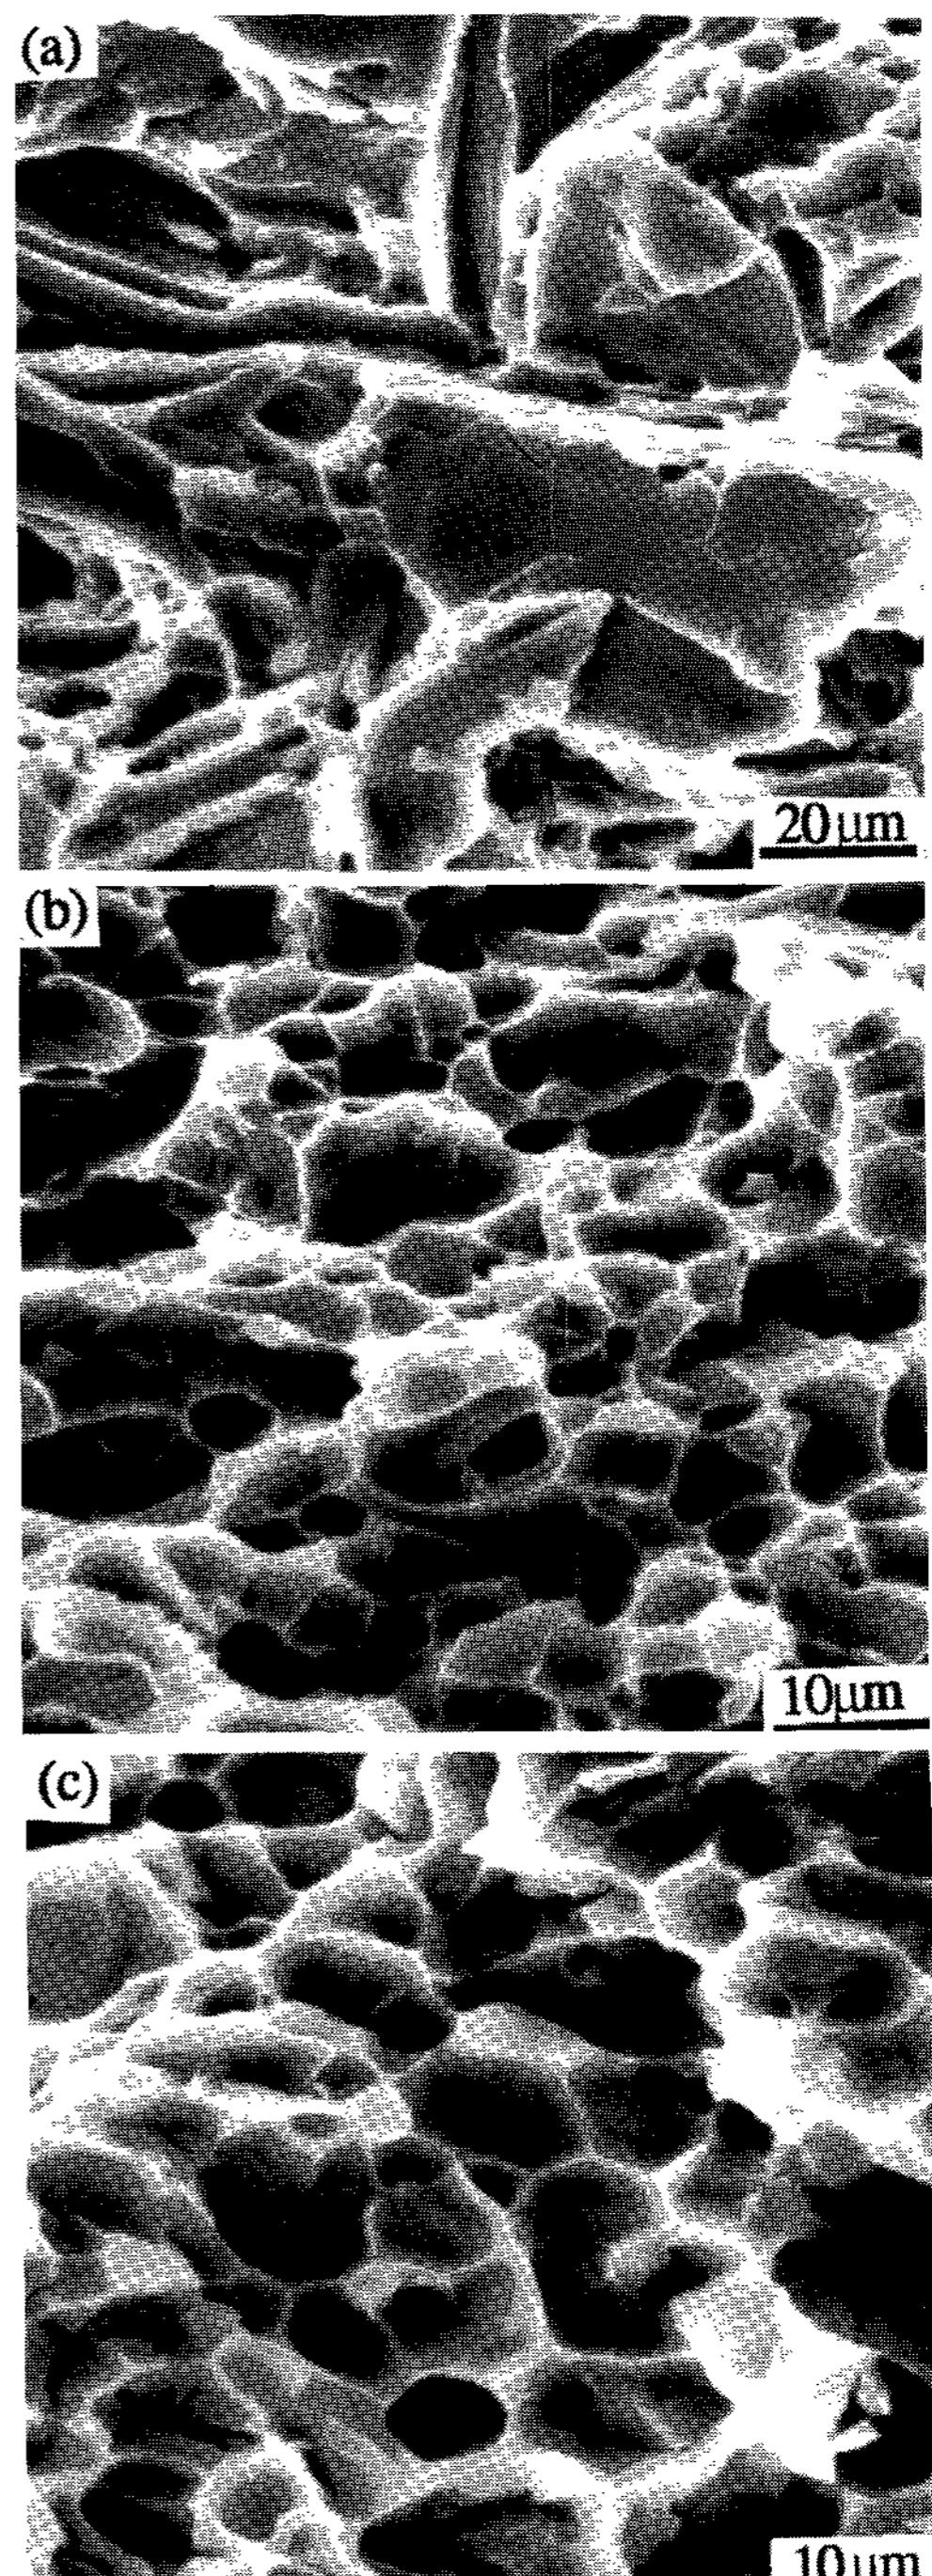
SEM fractography of tensile test specimen with Sr contents.
